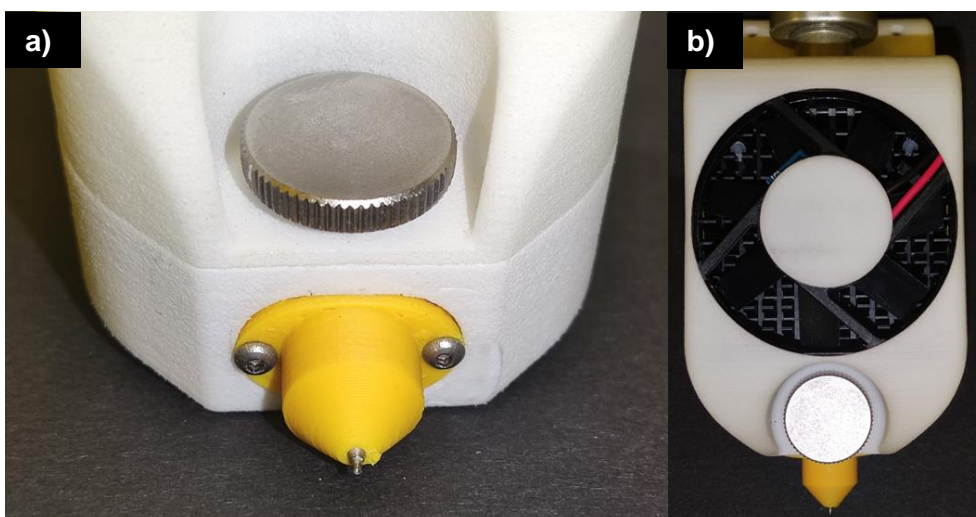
Fitting of FDM printed nozzle cap prototype: a) close-up of inserted nozzle cap, b) printhead with inserted cartridge and nozzle cap
